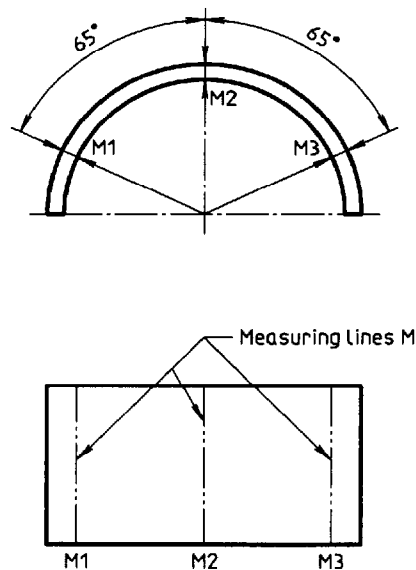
Three-line measuring scheme for half-bearings with $D_o \leq 150$ mm
